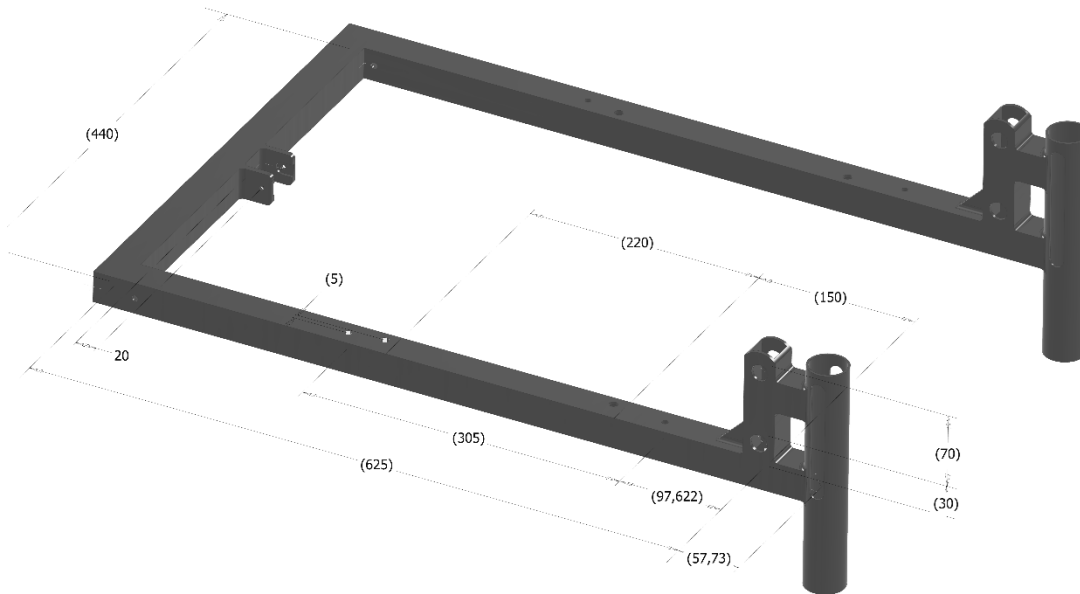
Chassis basic dimensions. Dimensions in mm.
